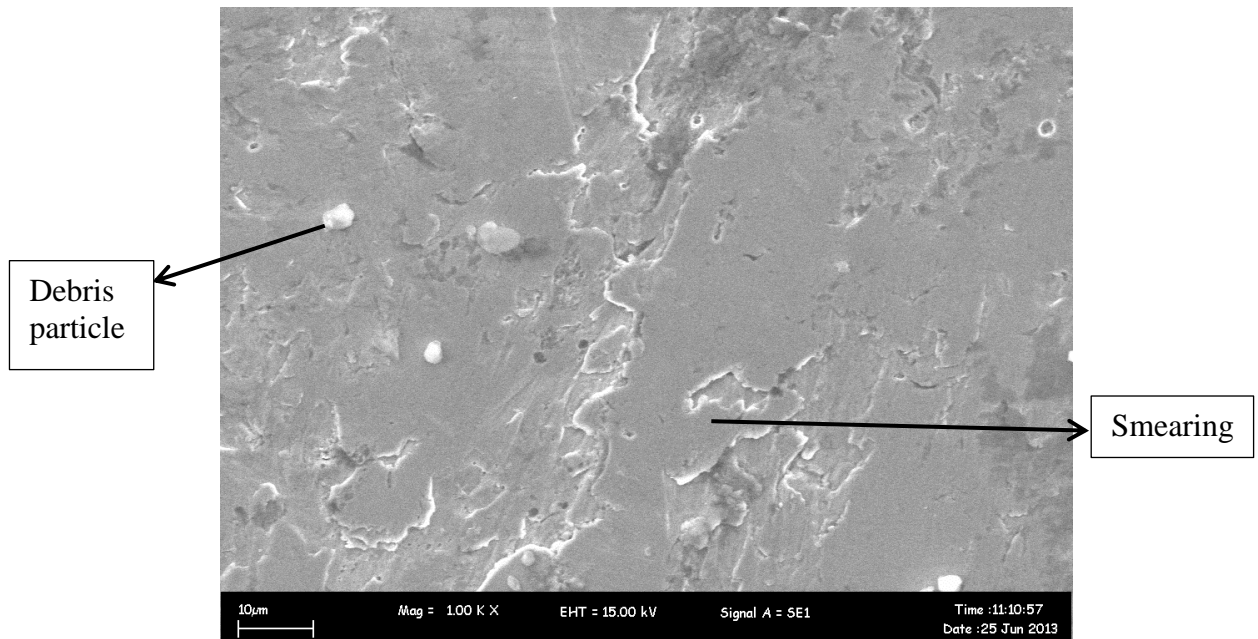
The surface damage at lower cutting speed of 66 m/min.
